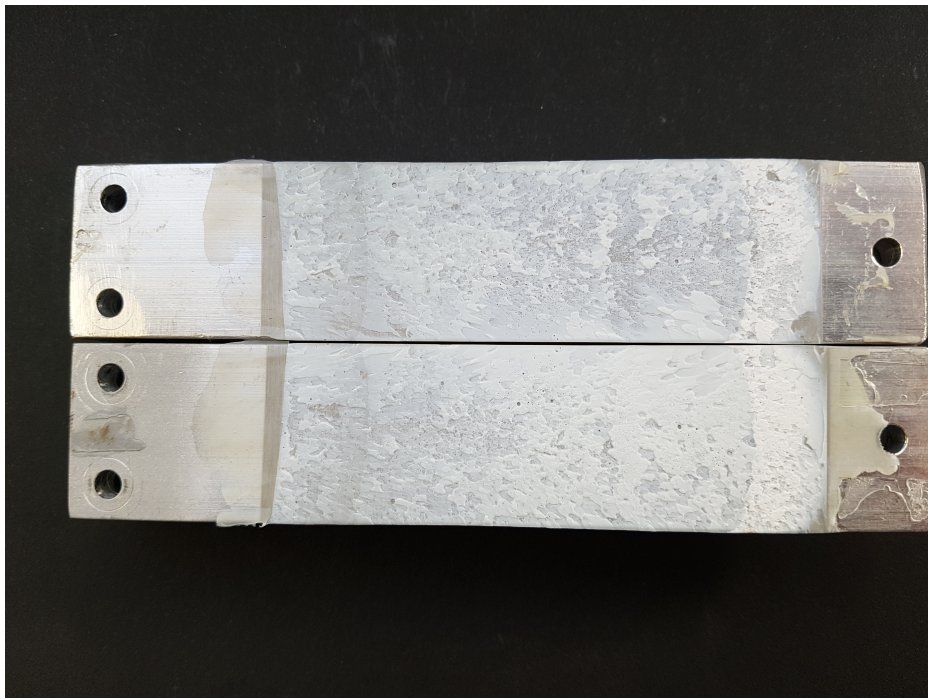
Fracture surface of a fatigue tested T-joint ($ED=0.51 \text{ J/mm}^2$ and $H=50 \mu\text{m}$) [158]
